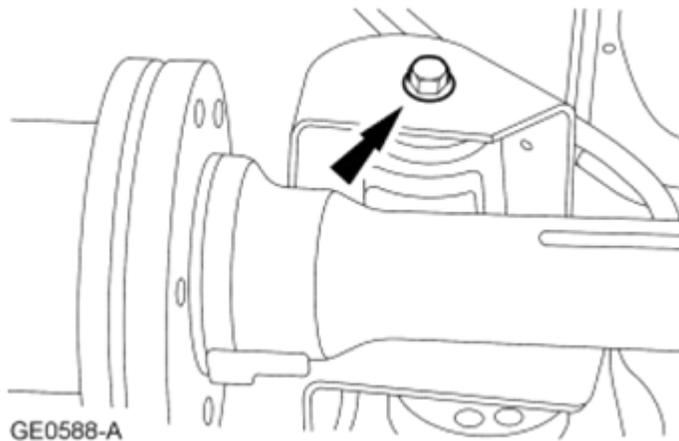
Locating Axle Shaft Housing Carrier Bushing Bolt
